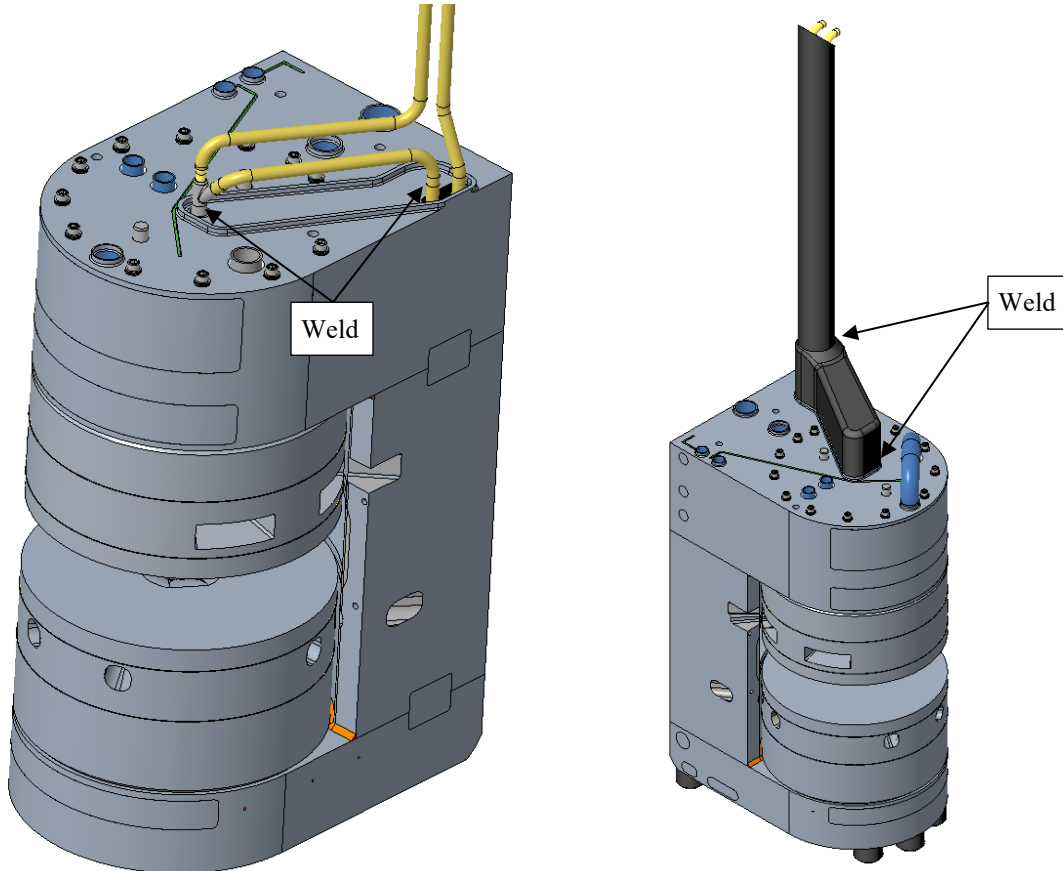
Upper hydrogen line welding (left) and upper vacuum cap and tube welding (right).
